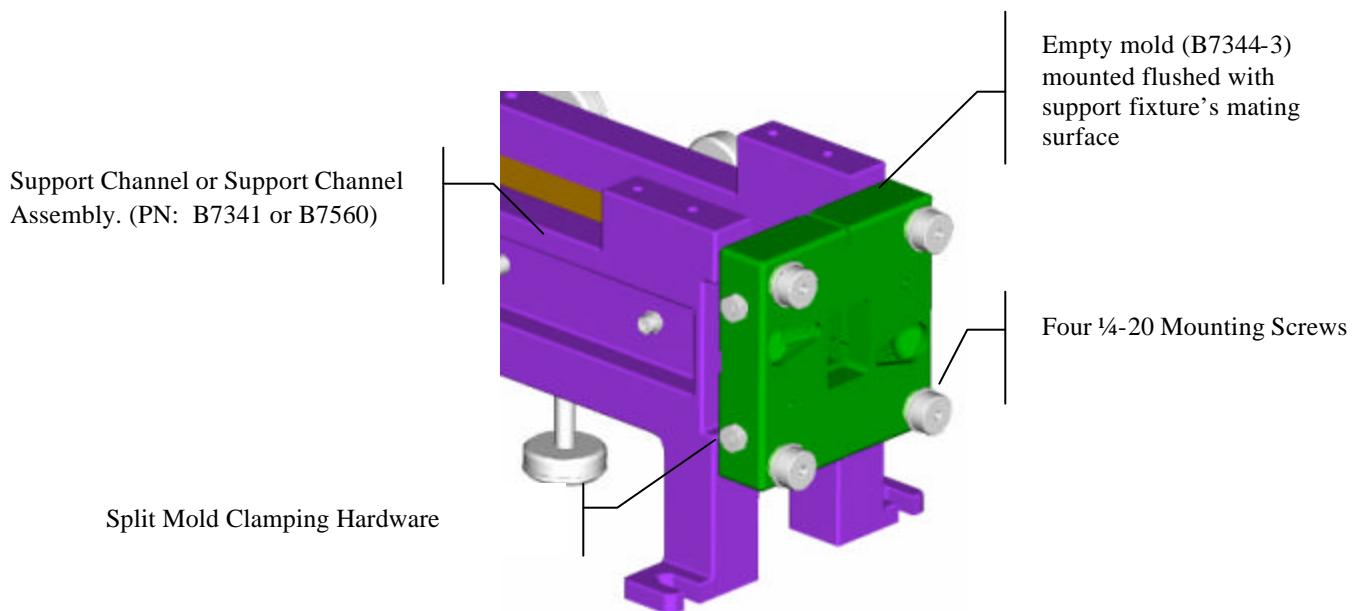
PN-B7340 Fixture Assy; Support Channel (B7560) & Empty Mold (B7344-3) View Shown
